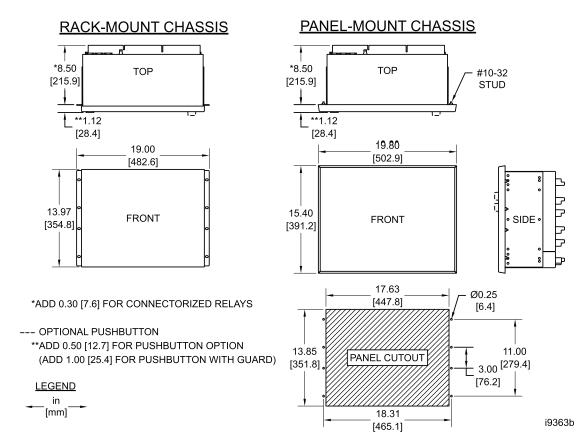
SEL-451 8U Dimensions for Rack- and Panel-Mount Models
